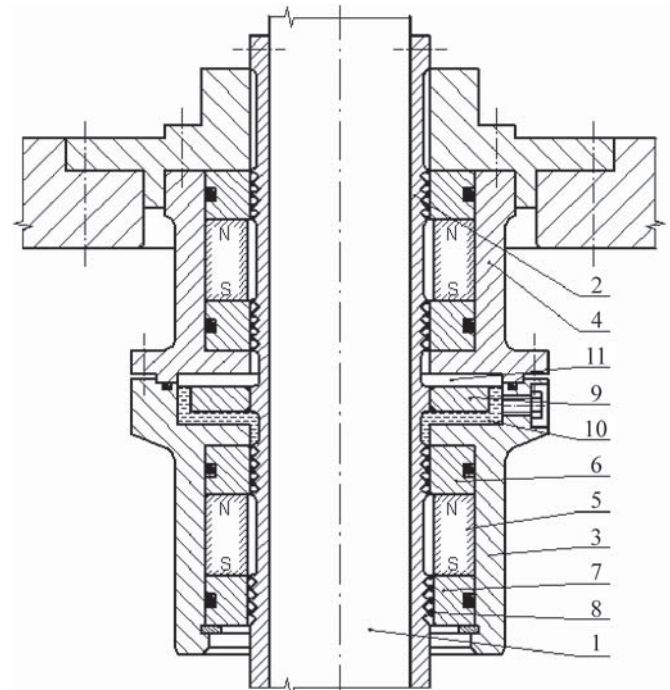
Hybrid magnetic fluid seal for a vertical pump shaft : 1 – shaft; 2 – sleeve with sealing lips; 3, 4 – casing elements; 5 – permanent magnet; 6, 7 – pole shoes; 8 – magnetic fluid; 9 – flange; 10 – barrier fluid; 11 – chamber
